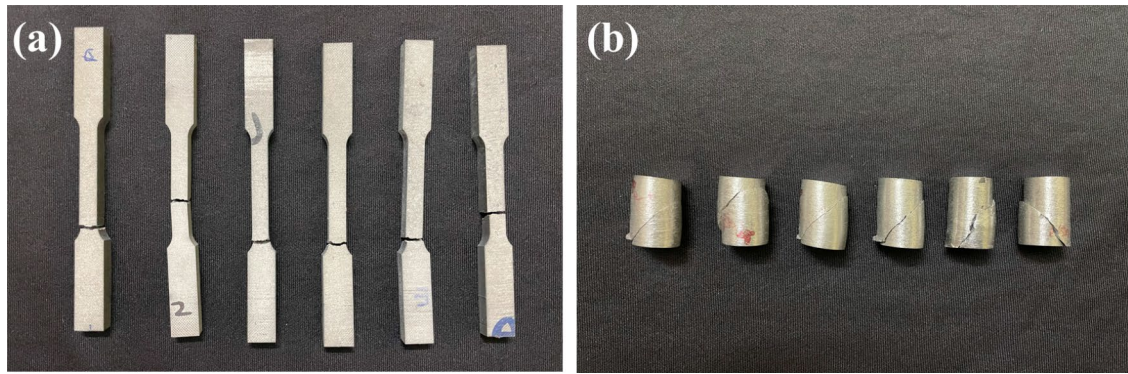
Fractured nanocomposites (a) Tensile and (b) Compressive specimens
